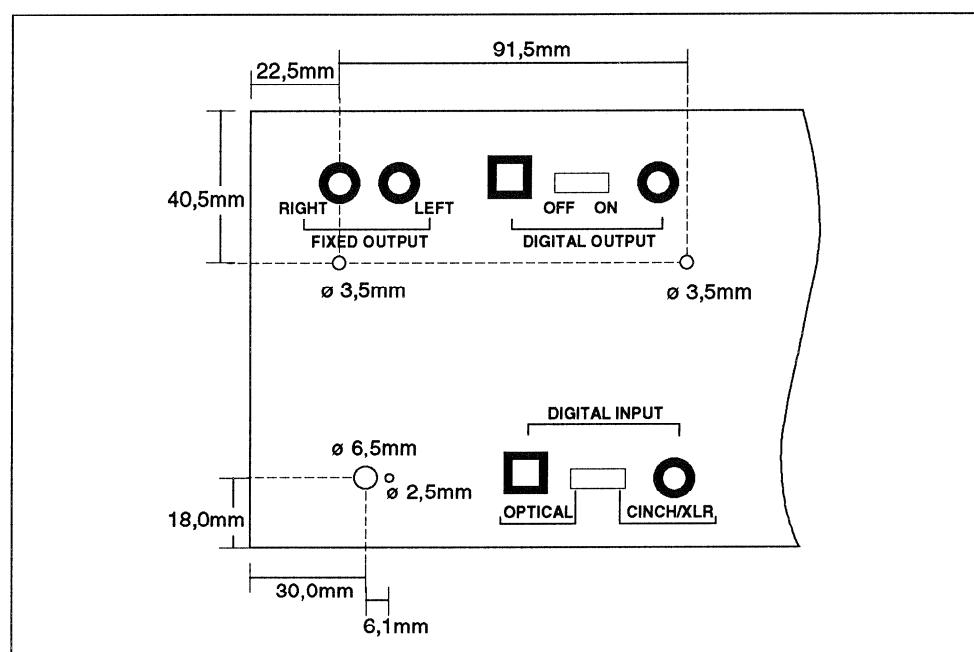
Mounting holes in the rear panel of the D740 and drill holes for the new switch.
